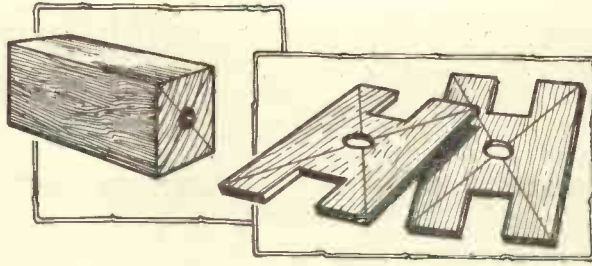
WOODEN SUPPORTS FOR WINDING THE BOBBIN.
